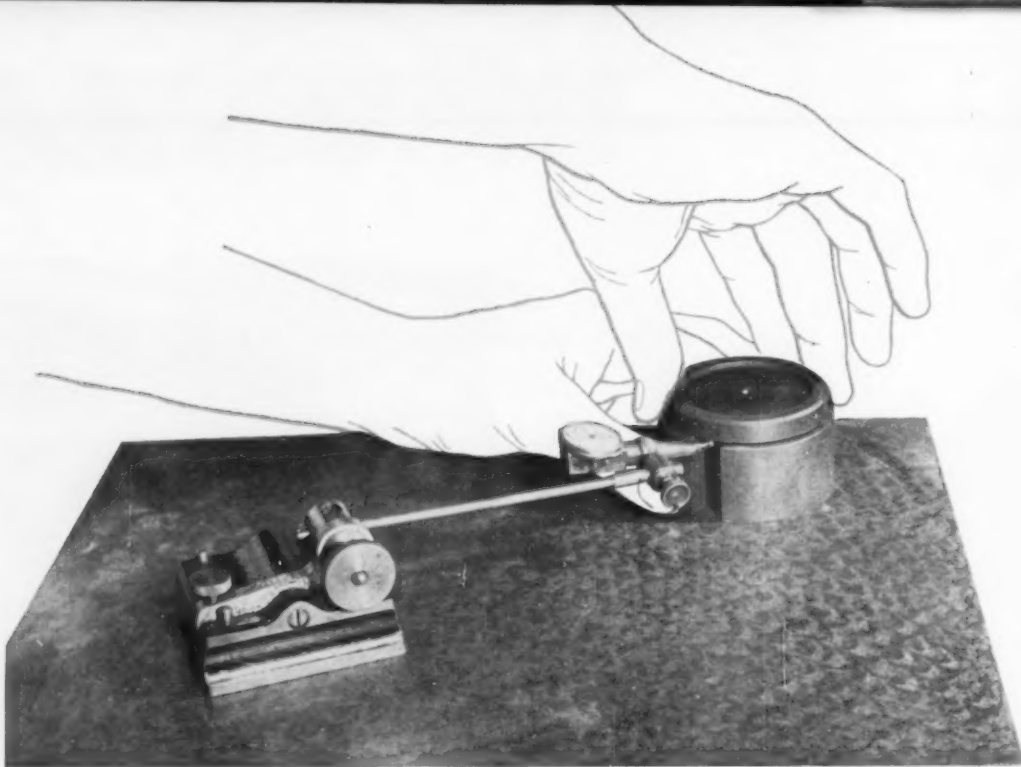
Checking runout of a nut on a functional gage, designed to simulate mating parts.
